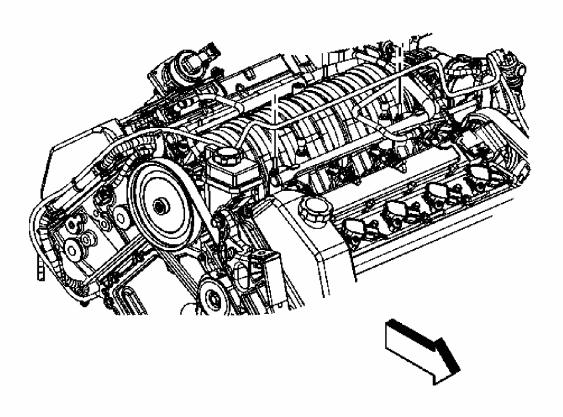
Locating Coolant Heater Cord Tabs Courtesy of GENERAL MOTORS CORP.
